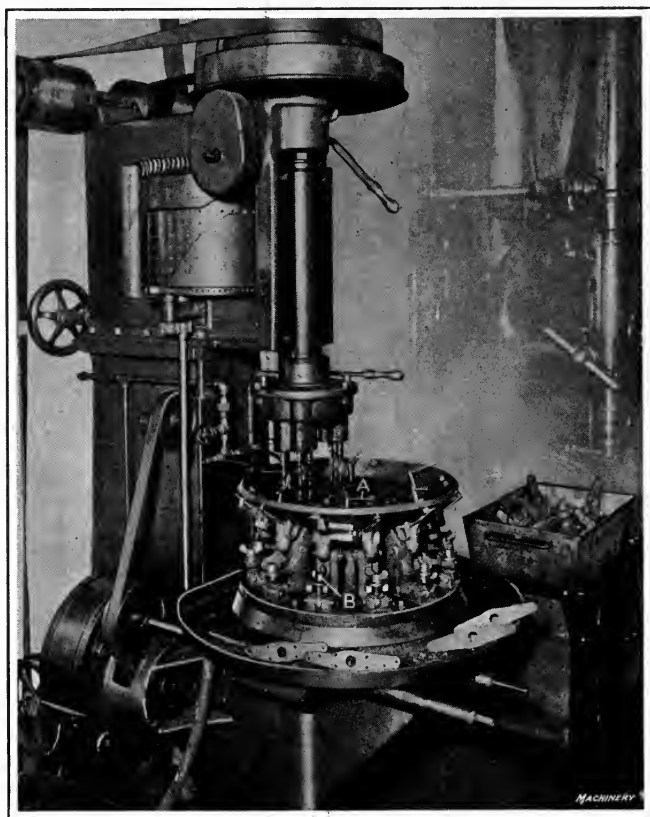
Semi-automatic Drilling Machine with Station-type Work-holding Fixture which is automatically indexed
